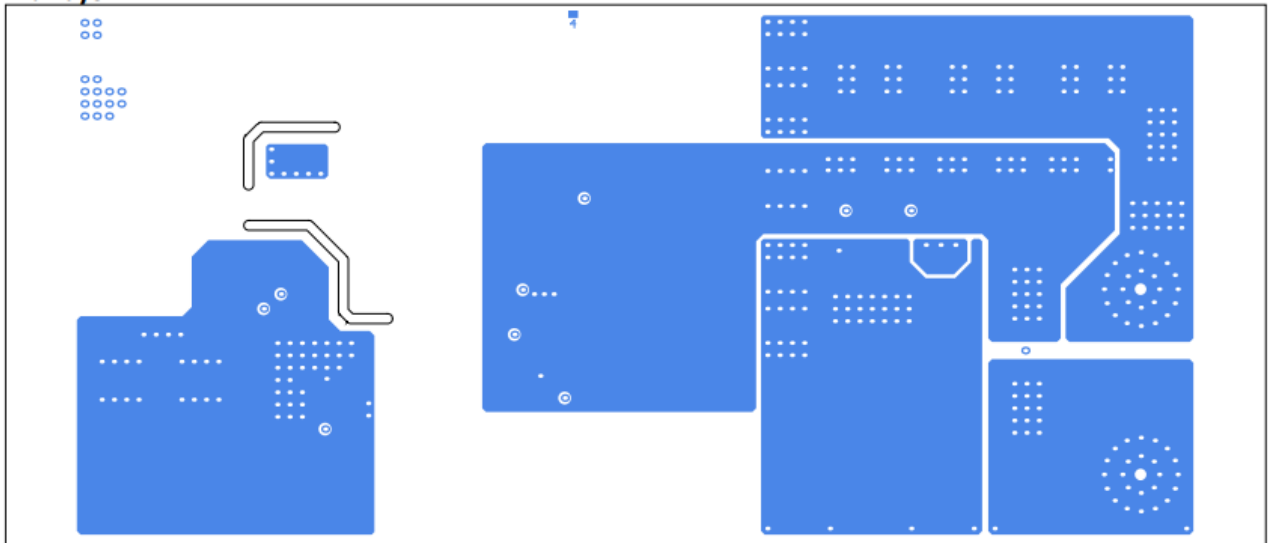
DER-952Q Mid-Layer 4 PCB Layout.
